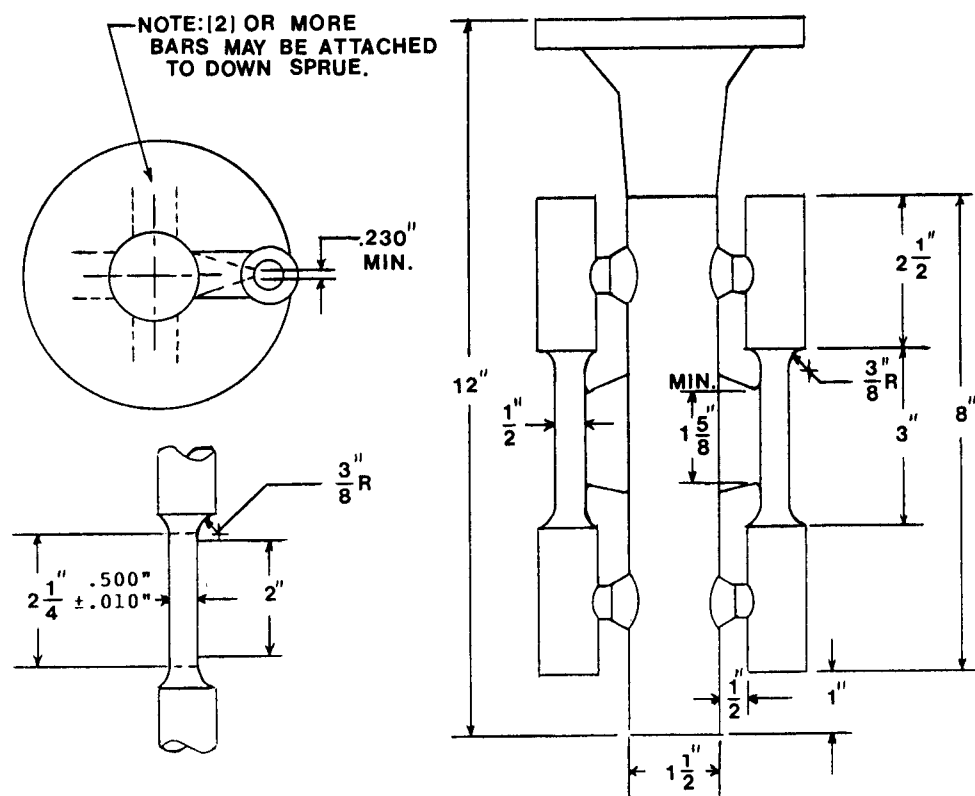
TEST COUPONS FOR CASTINGS WITH DETAILS OF DESIGN
